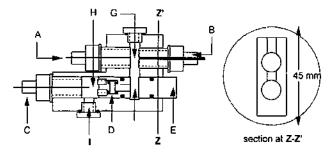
Small volume high-pressure electrochemical cell: (A) Pt or Au 1 mm disk working electrode assembly; (B) Pt 2 mm disk auxiliary electrode assembly; (C) Ag wire reference electrode assembly; (D) Vycor frit liquid junction piston assembly; (E) pressure transmission/volume compensation piston; (F) cell body; (G) sample solution; (H) reference electrolyte; (1) reference electrolyte and sample solution filling caps.
